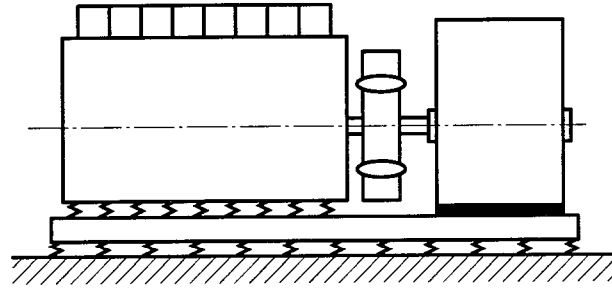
Engine resiliently mounted, generator rigidly mounted on resiliently mounted base frame, flexible coupling
